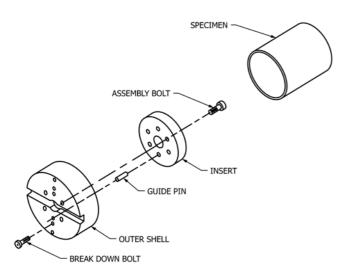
Assembly Drawing for the Compression Fixture and Specimen
